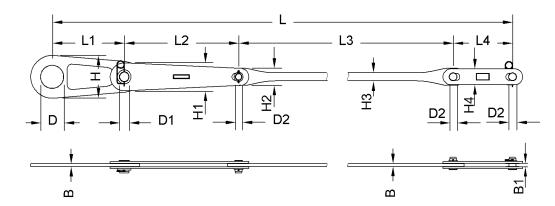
Dimensions of jib pendant strap on 1008 jib head section
